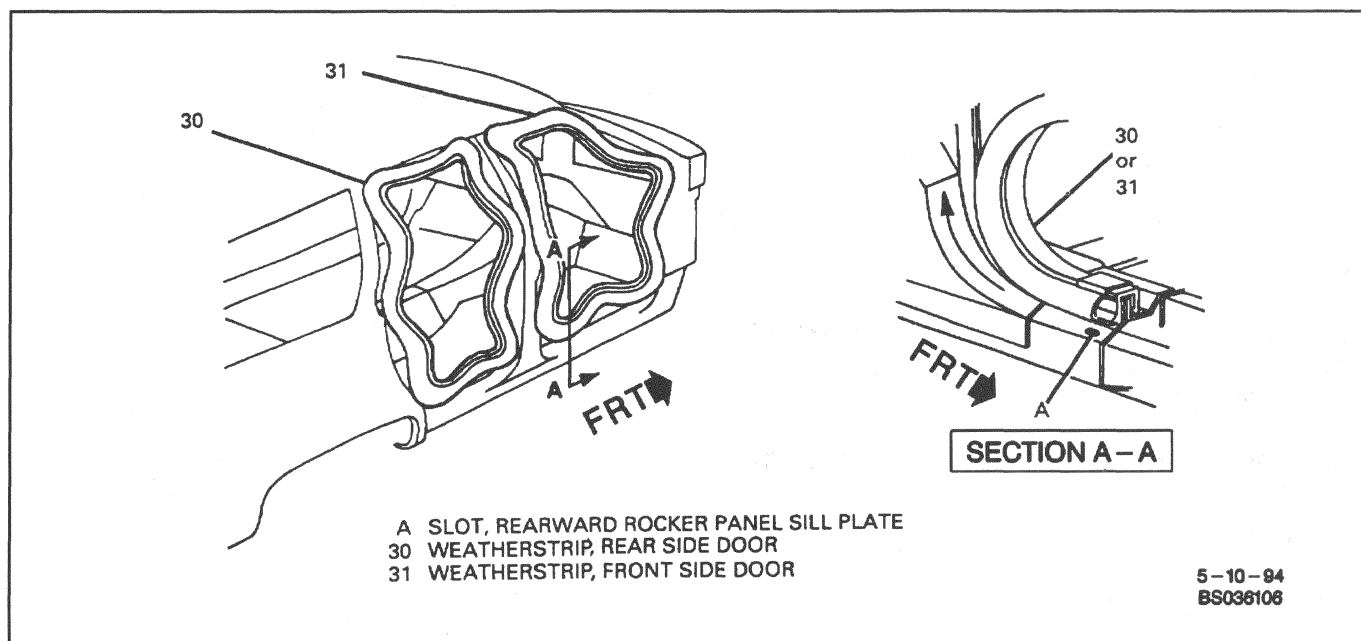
Front and Rear Side Door Weatherstrips-(Typical)
